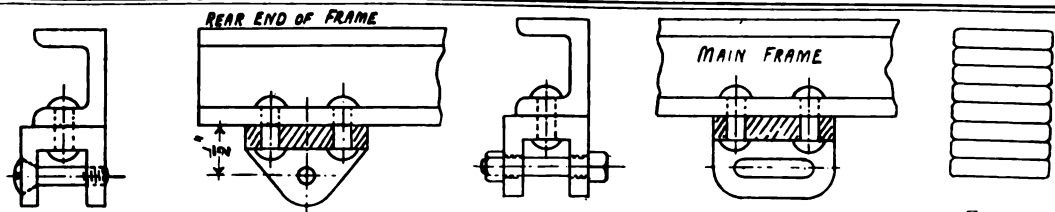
TWO THUS FOR REAR SPRINGS. (Full size.)
